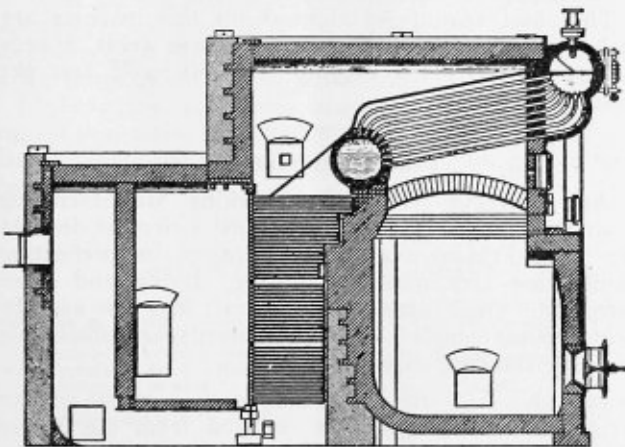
One of the boilers used in the tests leading up to the development of the Calumet boiler
